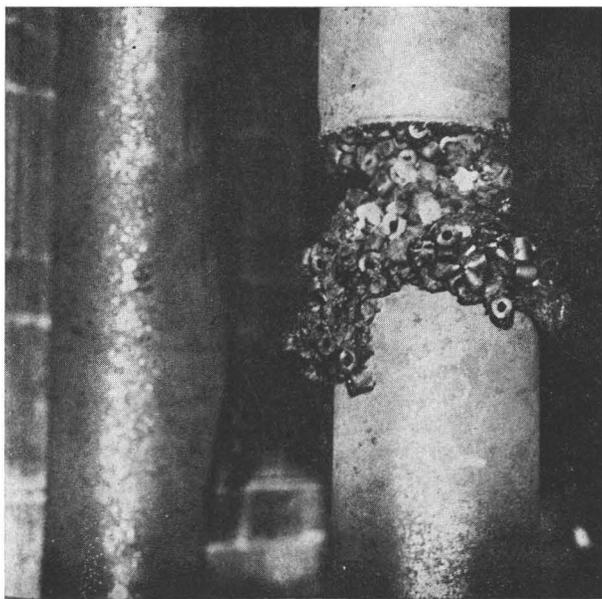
Thermal shock failure of reformer tube near weld due to ingress of boiler water.
